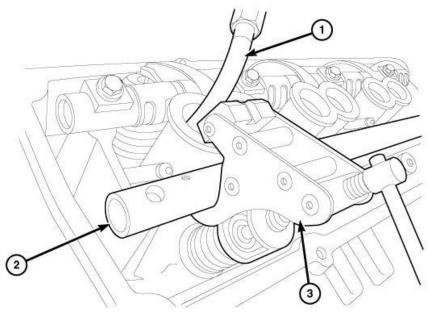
Valve Spring Removal Tools Courtesy of CHRYSLER LLC
